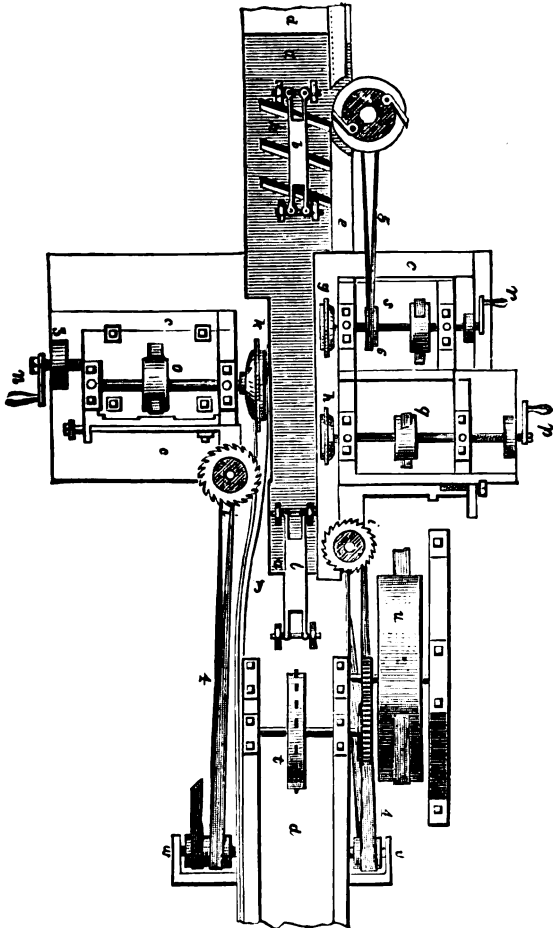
PLANING MACHINE PATENTED BY MUIR, A.D. 1827.
